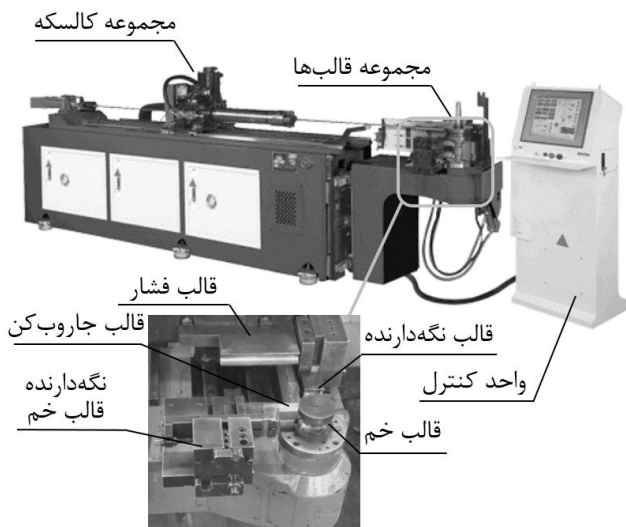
Numerical control machine tube bending shuz tung 50BR3 model
